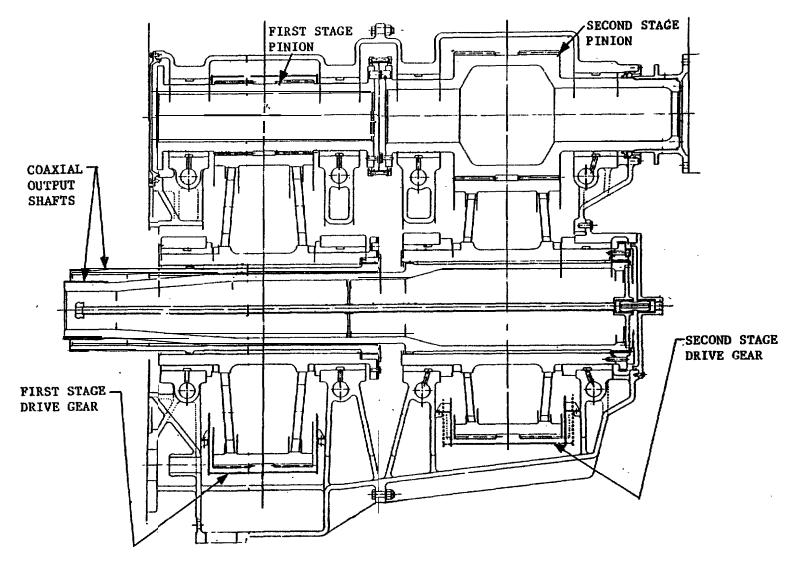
(U) Propulsor Assembly Gearbox Arrangement (U)
